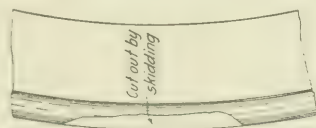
Steel Tire Cut by Skidding and Reclaimed by Oxy-Acetylene Welding.
